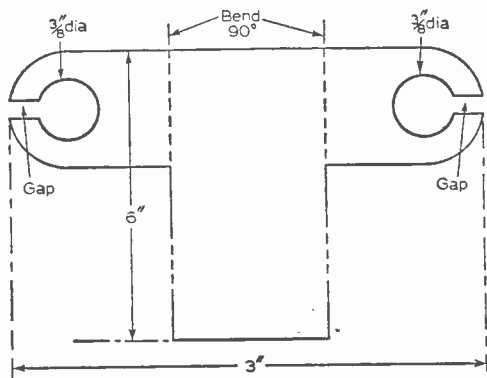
A suggested addition to the chassis for mounting the ferrite rod aerial.
